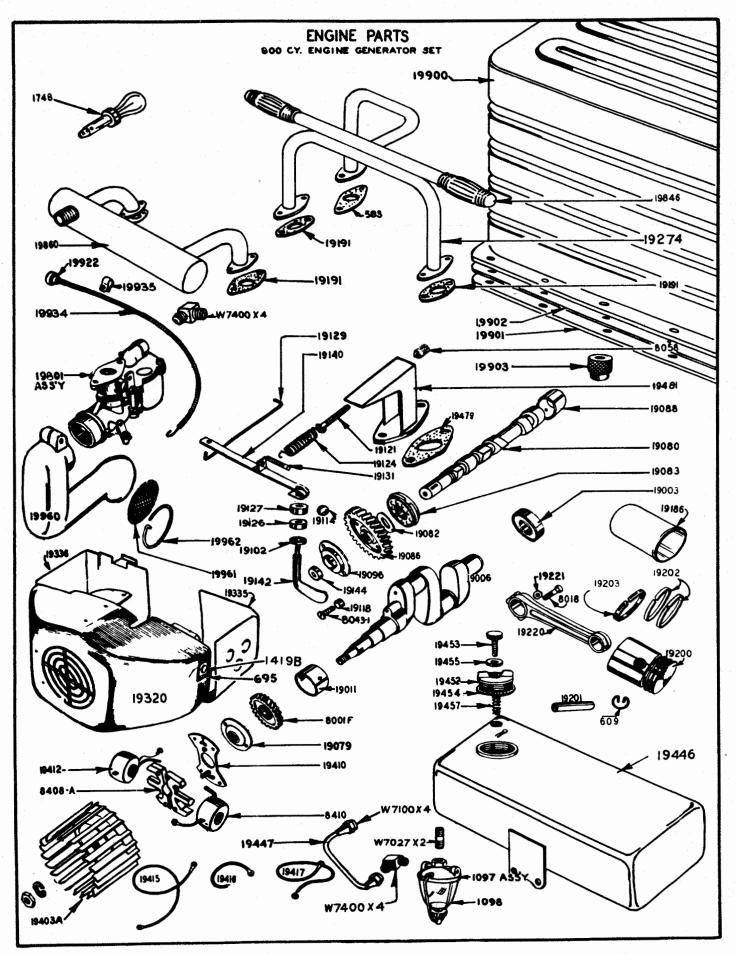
Engine Parts, Detail Components for Engine Generator Set Type CDO-73004-A.
